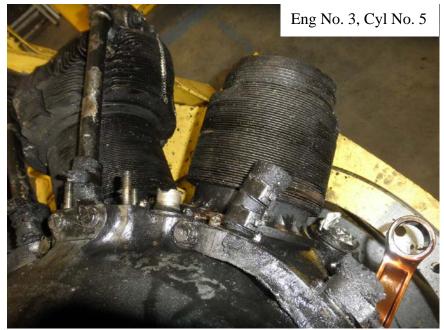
View of No.5 cylinder barrel in place on the crankcase.
